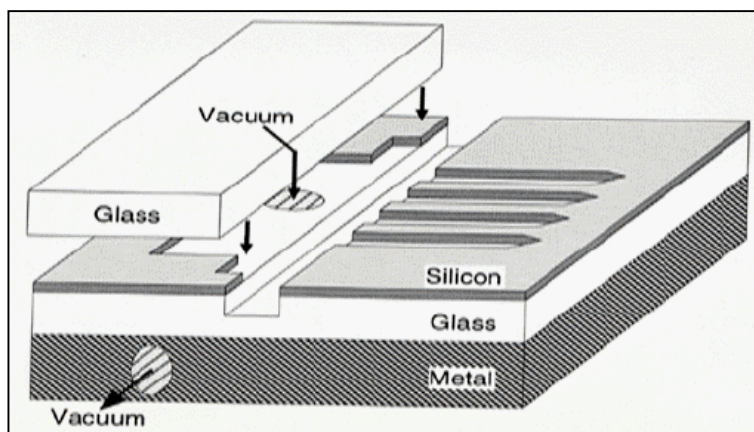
Perspective view of a micromachined jig for bending beam lead transfers in a 3D array.
